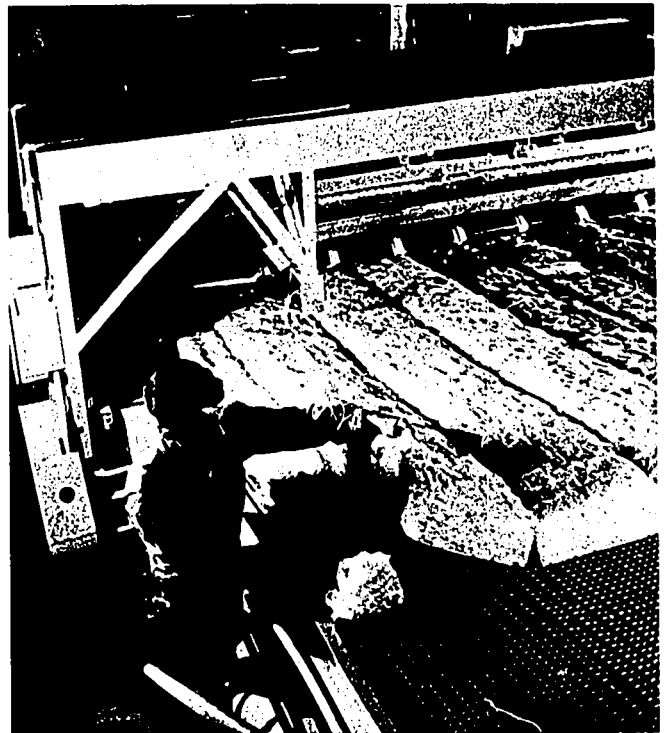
Here, a slicing process is done by a semi-automated shearing machine. Wide sheet insulation stock is fed into the shearing machine which slices it into strips.
